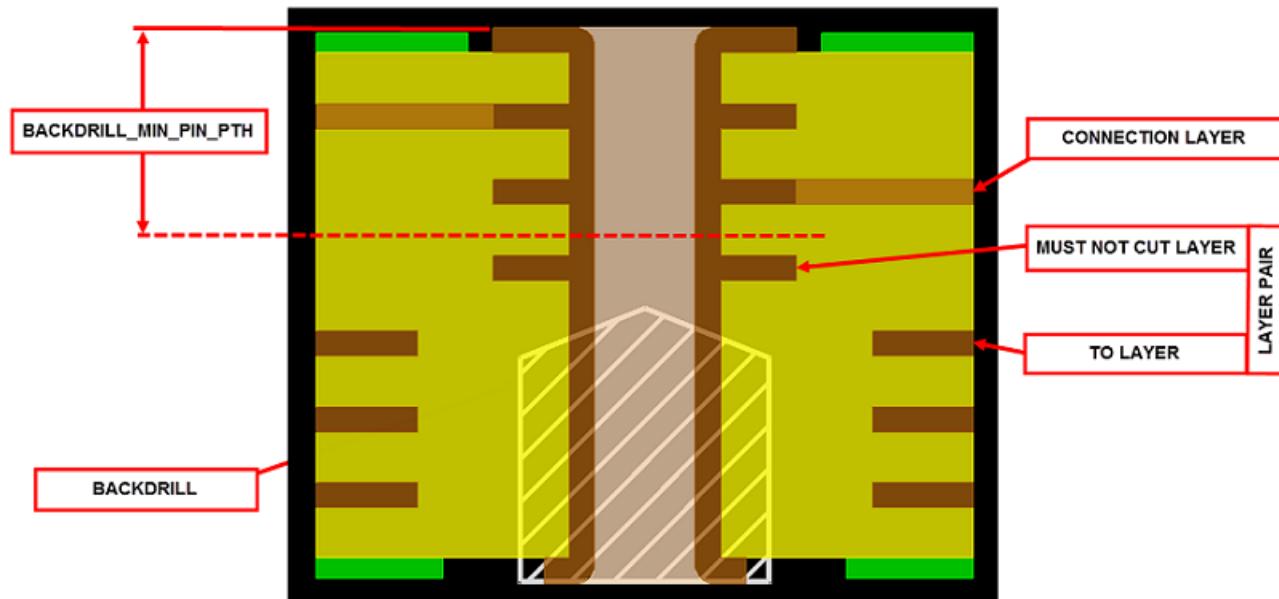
Must Not Cut Layer surface outside minimum pin plating depth
